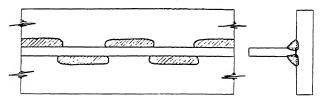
Staggered Intermittent Fillet Welds
